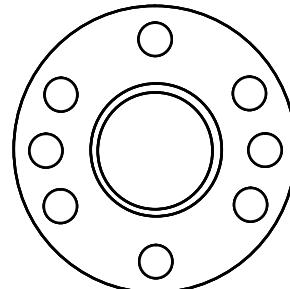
Crankshaft Ultrasonic Inspection Method Location
